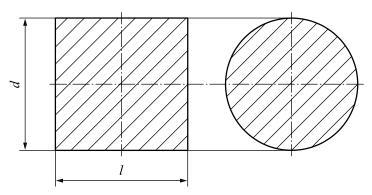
Test cylinders with axial length l and diameter d (l = d)
